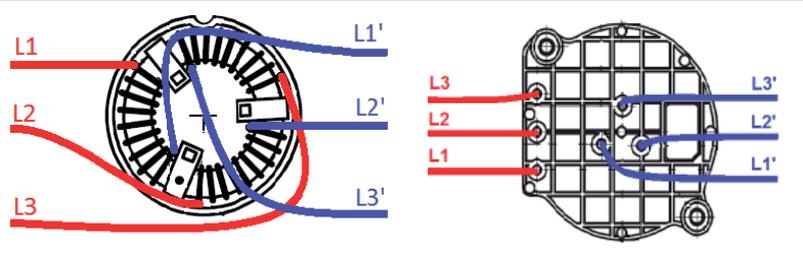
left side: PCB layout with conventional horizontal 3-wire choke; right side: Layout with RB6132
